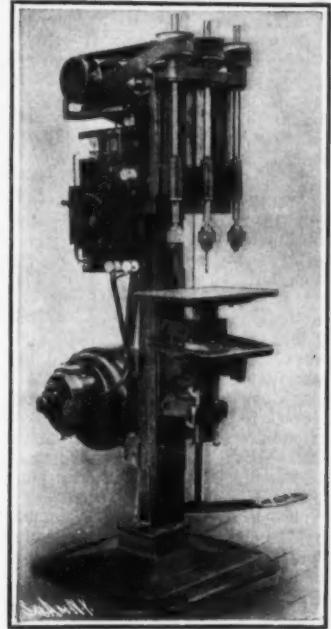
THREE-SPINDLE DRILL PRESS.
